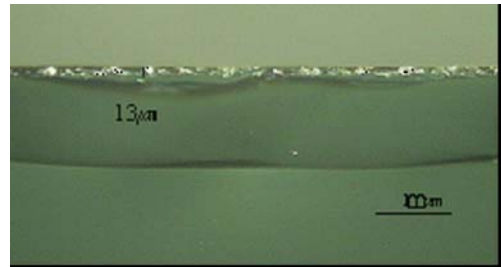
Section view of cut surface by wheel scribe with vibration input to flat glass
